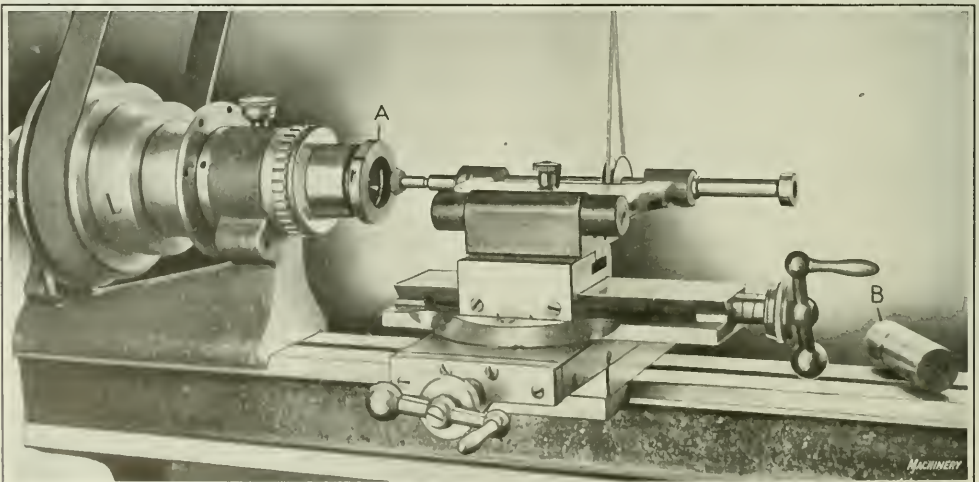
Bench Lathe Set-up for grinding Internal Bearing Surfaces in Spring Collets
